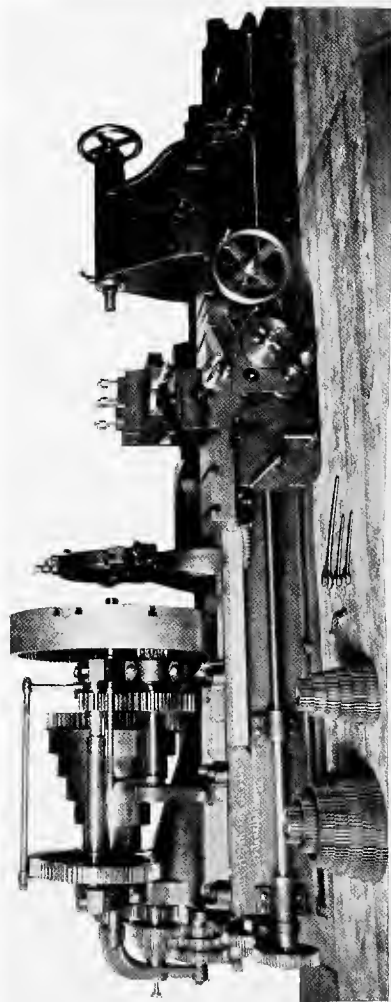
LATHE BUILT TWELVE OR FIFTEEN YEARS AGO
